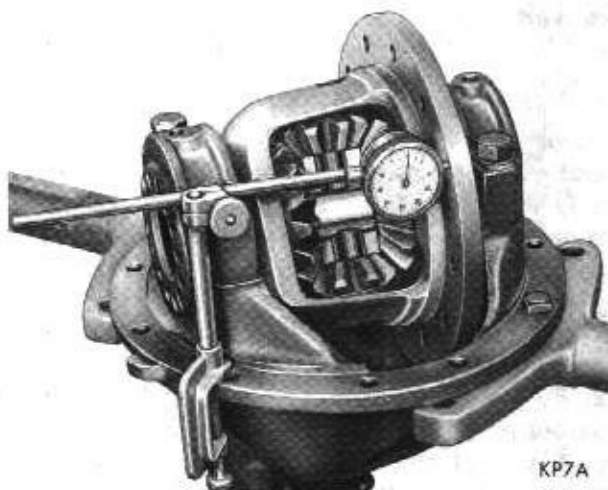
Checking Drive Gear Mounting Flange Face Runout
